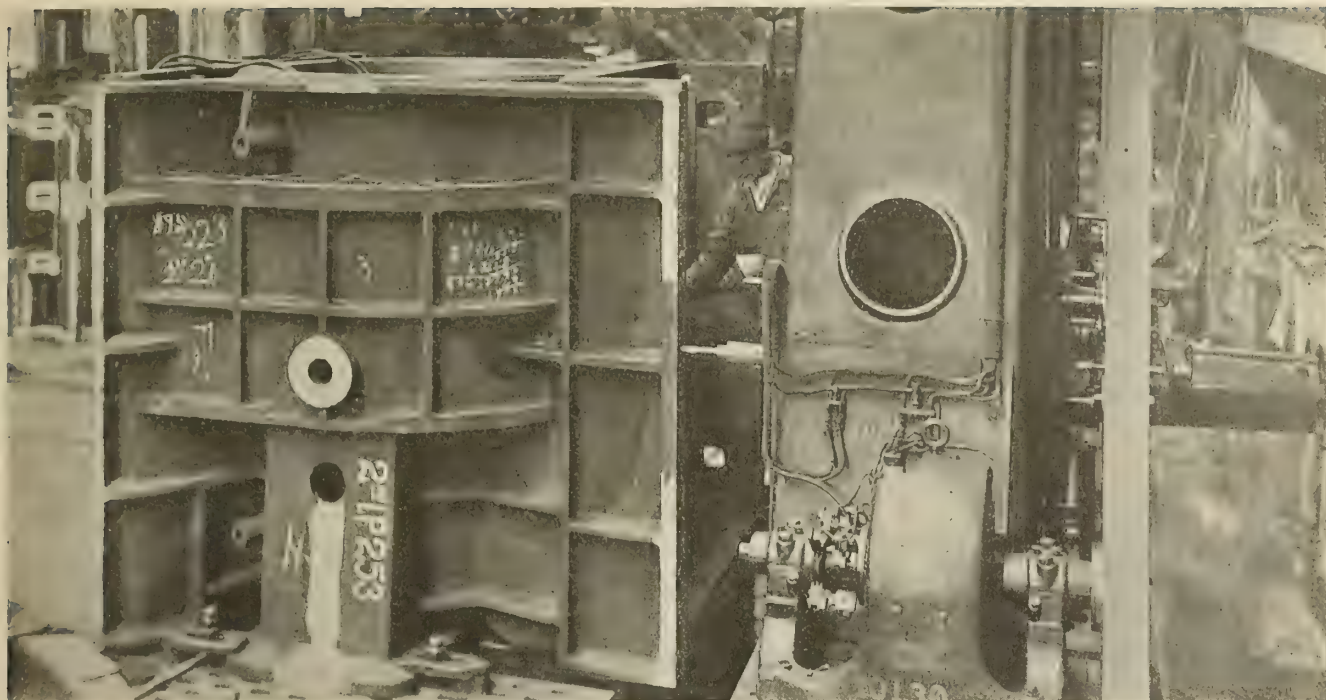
Drilling Holes in Cylinder on Horizontal Drill Press
